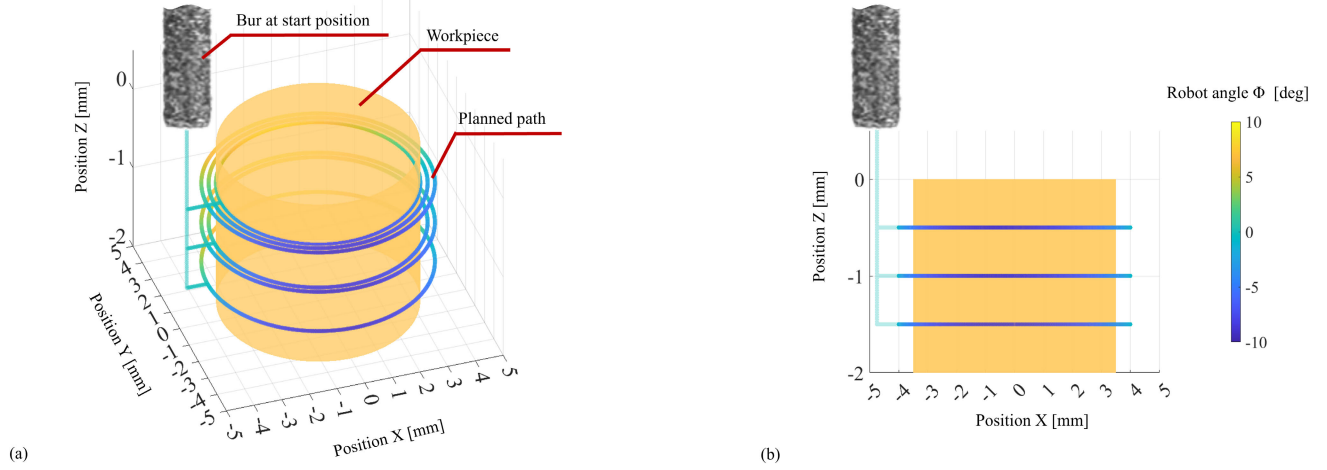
A discrete conical path used in the experiments, shown with a workpiece and a bur tip in 3D view (a), and in side view (b). The path consisted of three layers, each composed of circular paths with different diameters. The miniature intraoral robot's angle (Yaw ϕ) along the path is represented by the color of the path. The discrete conical motion path started at the top of the cylindrical workpiece. The first layer consisted of three circular paths with decreasing diameters, each reducing the radius by 0.25 mm and cutting 0.5 mm deep into the material in the z -direction. The first layer in this path resulted in a total radial material removal of 0.75 mm. The second layer consisted of two circular paths, spaced 0.25 mm apart in radius with a further 0.5 mm depth of cut. This second layer path resulted in a total radial material removal of 0.5 mm at a depth of 1.0 mm. The third layer consisted of a single circular path at the outermost diameter, completing the conical shape with material removal of 0.25 mm at the depth of 1.5 mm. Each circular path corresponds to a constant width of cut of 0.25 mm and a depth of cut of 0.5 mm, resulting in a stepped approximation of a conical profile.
